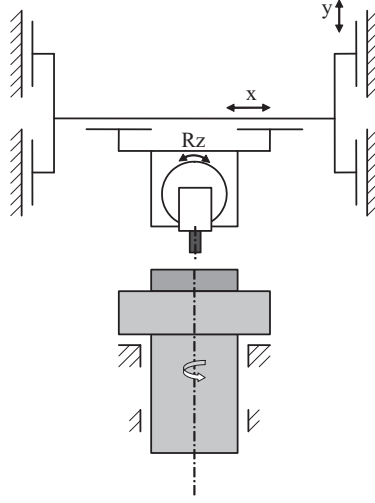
Layout 2, fixed workpiece spindle and large y-slide
